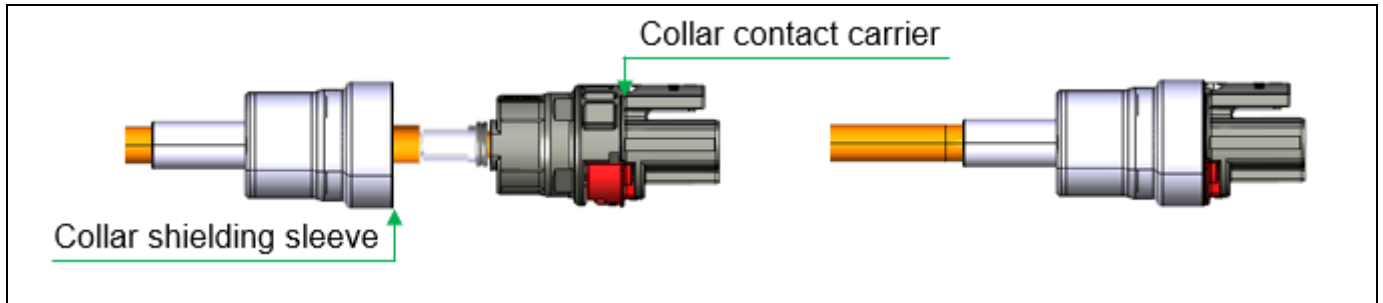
Representation 6.0 mm² SCC polarization shielding sleeve and contact carrier (4.8 Slide the shielding sleeve onto the contact carrier)
